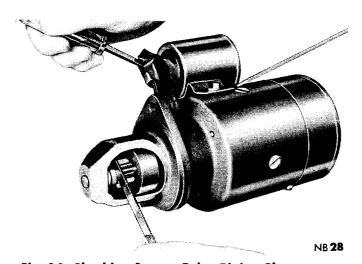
Checking Starter Drive Pinion Clearance soft jaws and tighten vise sufficiently to hold starter.
